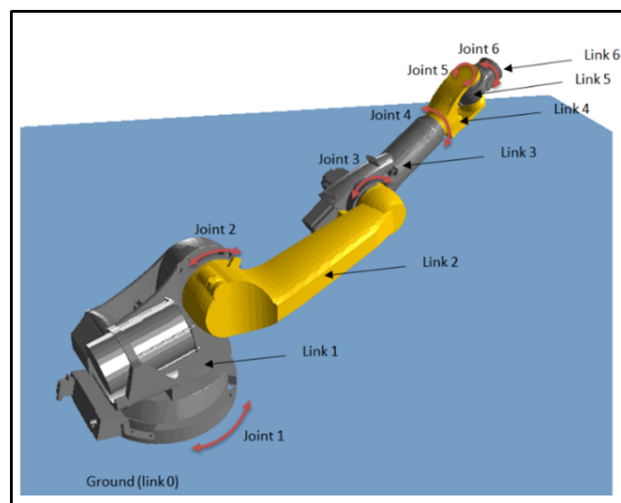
Example of Robotic Manipulator with Labelled Joints and Links
